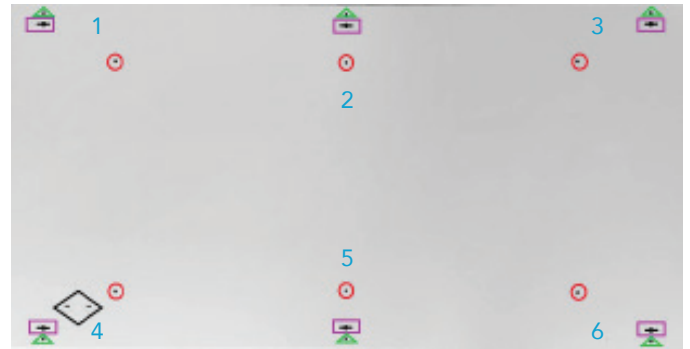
C-Frame back. Each shape represents a different set of holes. Diamond denotes power knockout hole.
